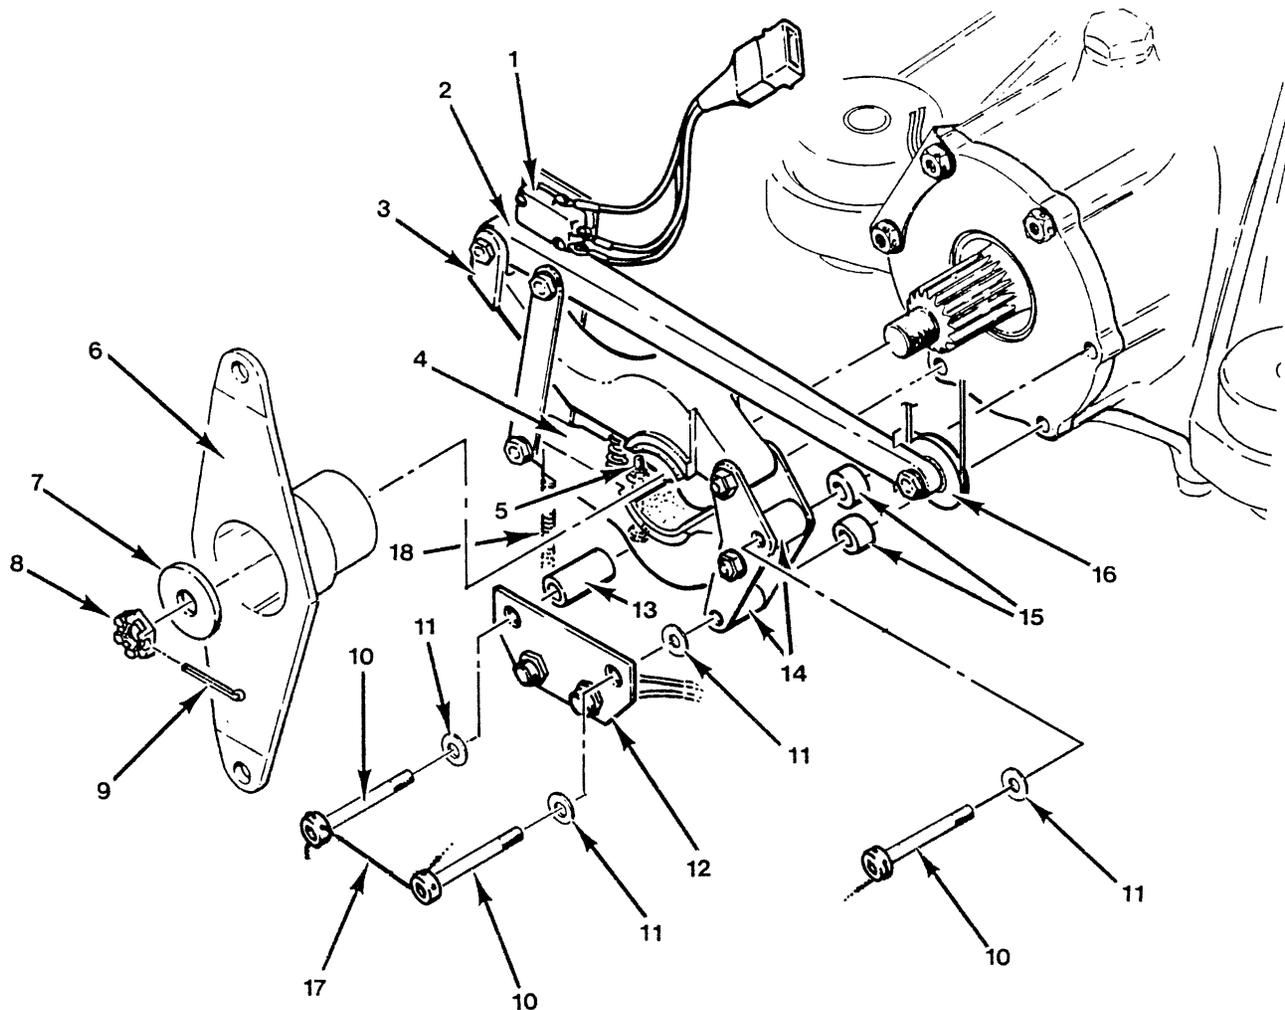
ROTOR BRAKE INSTALLATION
